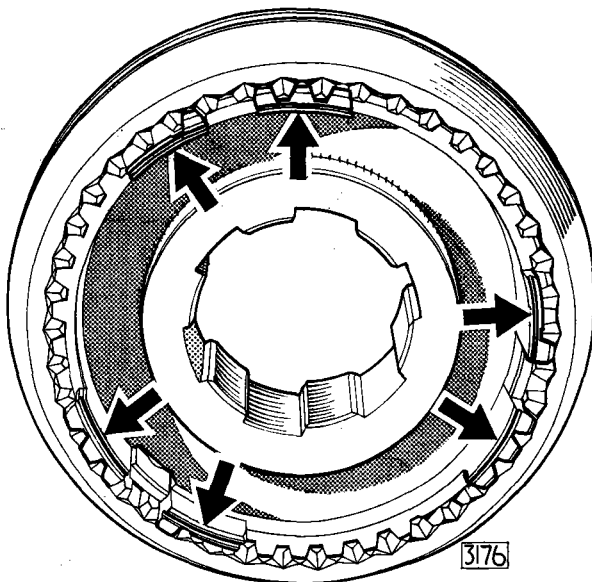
Identification grooves—3rd/top, synchro assembly.
